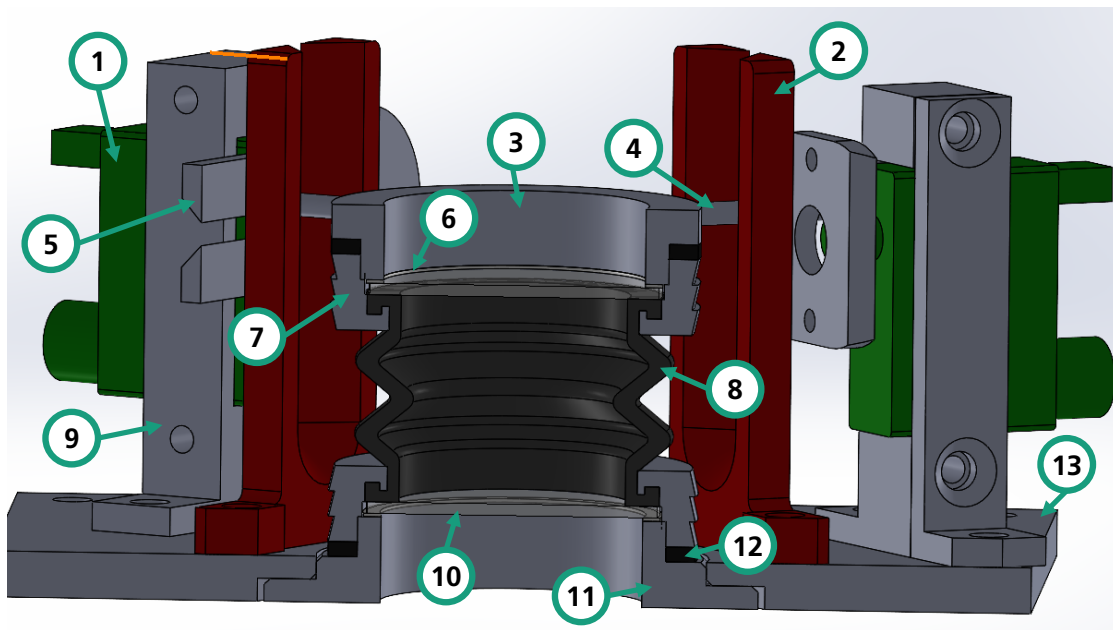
Cross-section through a CAD drawing of the liquid-filled prism and its actuation. (1) Servo motor. (2) Lever guidance. (3) Metal housing of outer part with lever connection. (4) Lever. (5) Servo handle. (6) Spacer. (7) Metal housing inner part. (8) Flexible silicon shell. (9) Servo mount. (10) Glass plate. (11) Metal housing of outer part with base plate connection. (12) Spacer. (13) Base plate.
